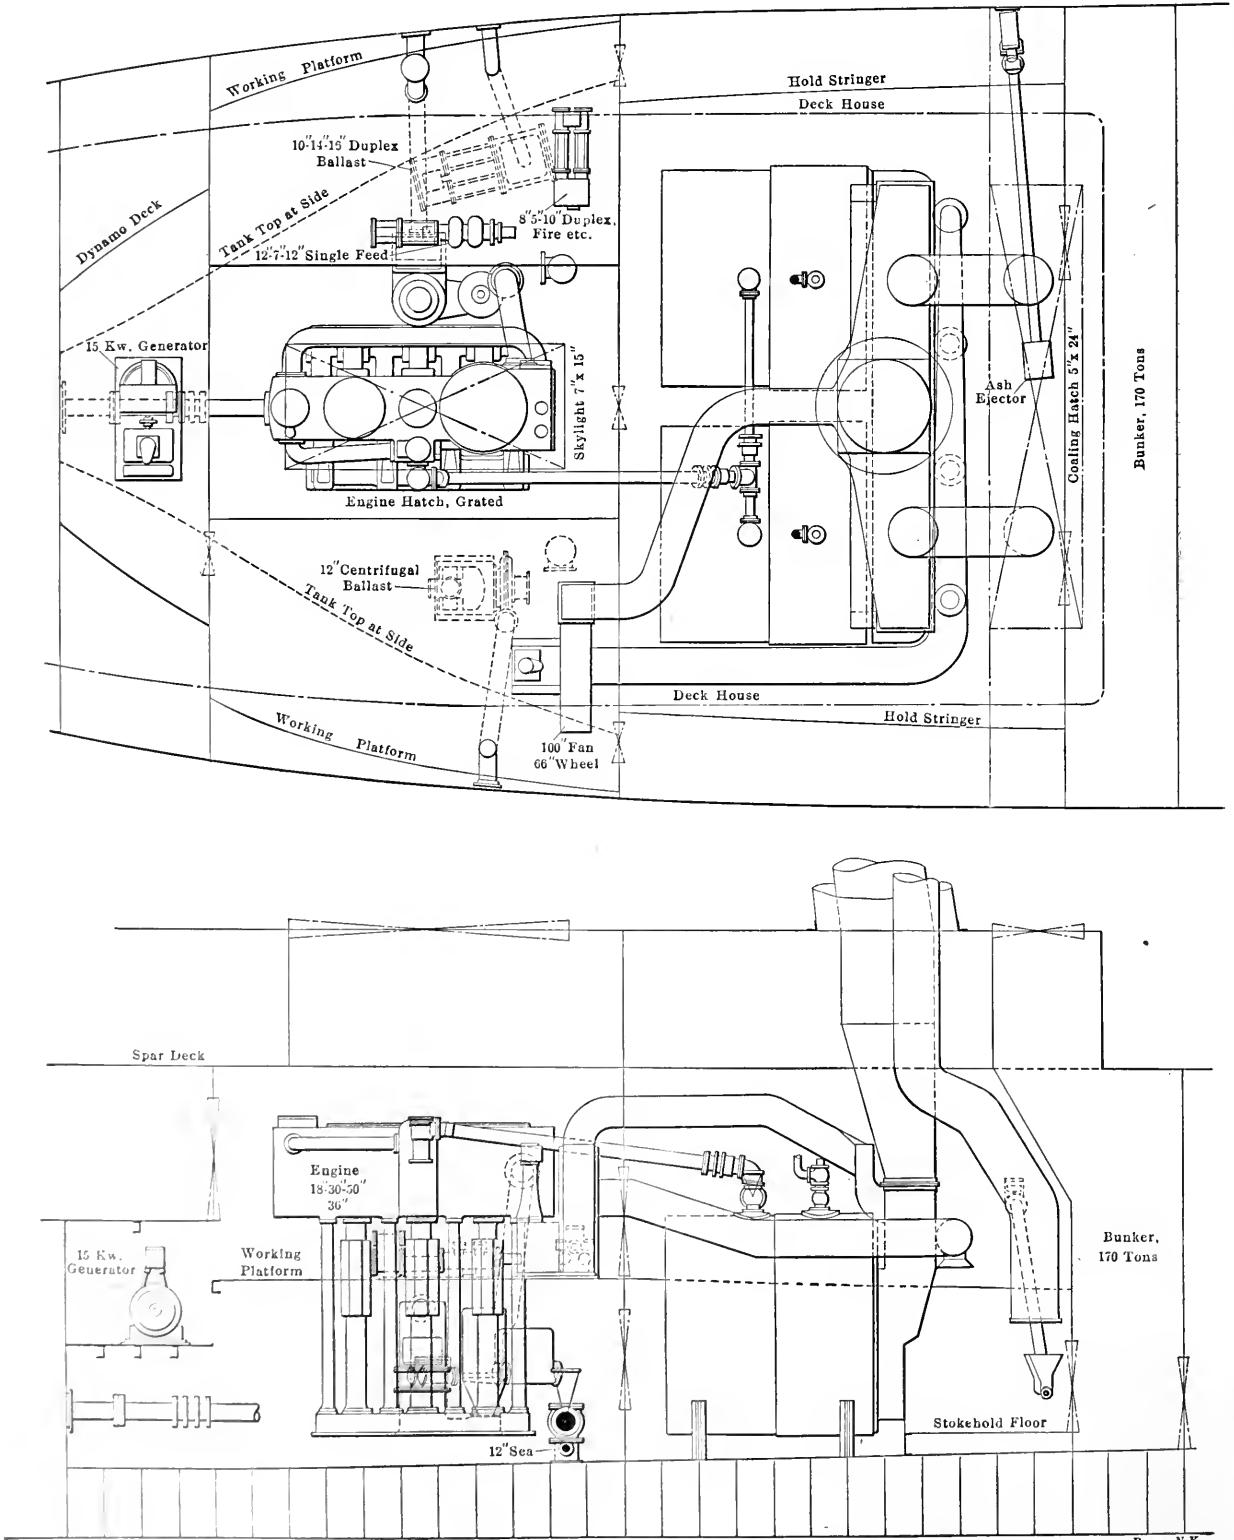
PLAN AND ELEVATION OF 1000-HORSEPOWER STEAM-POWER EQUIPMENT INSTALLED IN LAKE FREIGHTER
